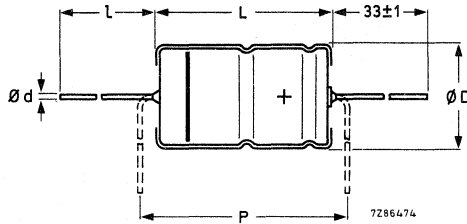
Style 1; see Table 1a for dimensions d, D, L, l and P.
